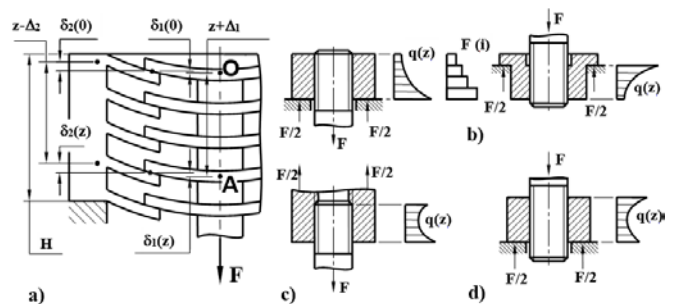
Calculation scheme and schemes of loading of threaded joints.
